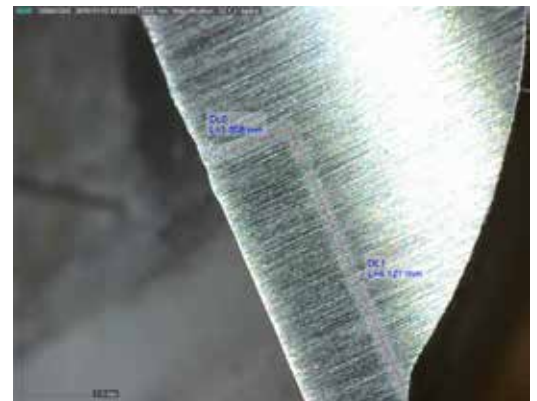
Brazed aluminum parts after careful attention to process details, shows no voids.
